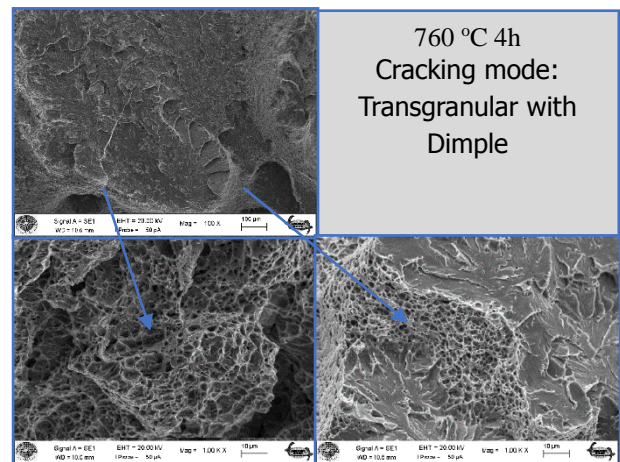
Fracture surface of weld metal, PWHT at 760 °C for 4h
